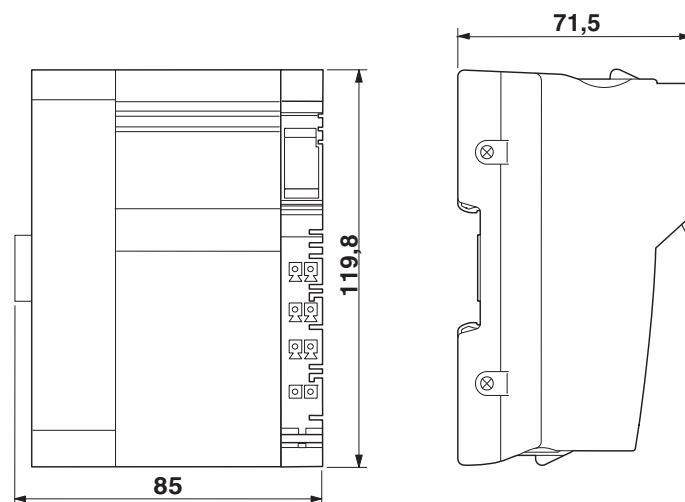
Dimensions of the electronics base (container housing 1, in mm)
